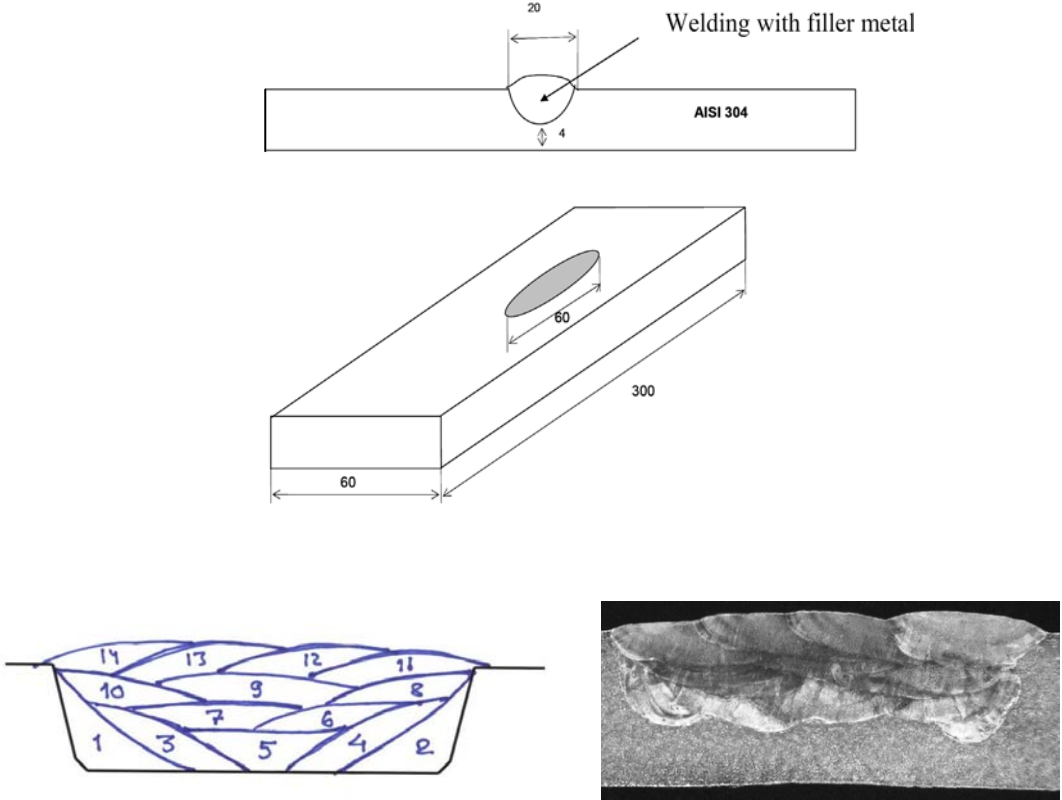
Test piece for Varestraint testing of pure weld metals and weld pass sequence of the test specimen welded with filler metal Alloy 82.
